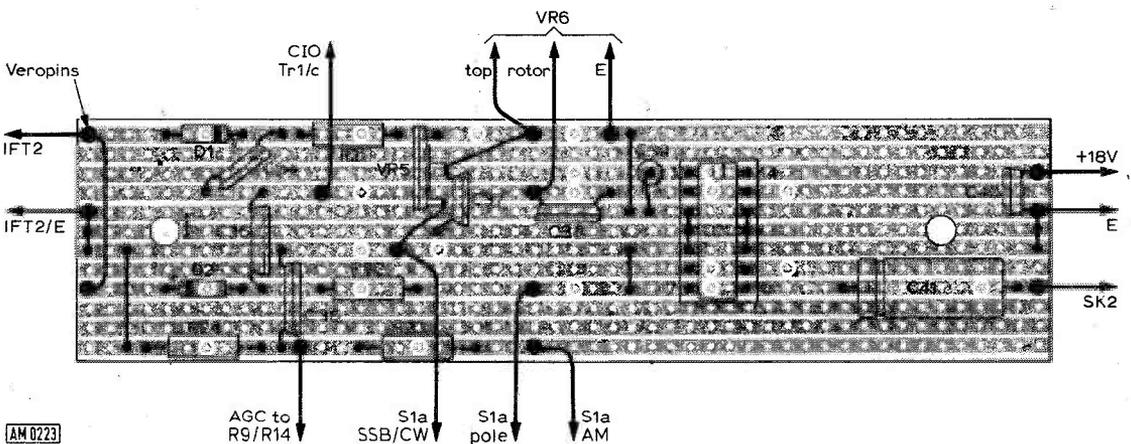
above, gives the location of the principal components under the chassis. Figs. 10 and 11, left, show the layouts for the carrier insertion oscillator and product detector boards, actual size. Each board can be tested before being fitted into the chassis.
